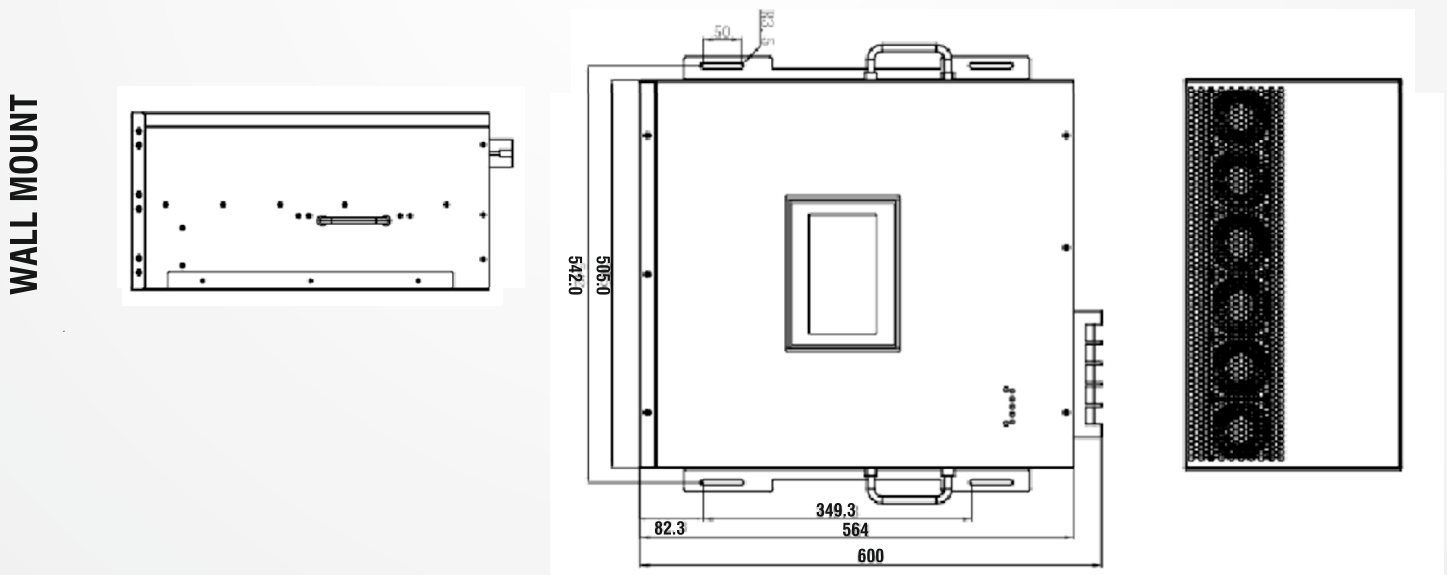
2 Overall Dimension Drawing (Unit: mm) of wall mounted Module
